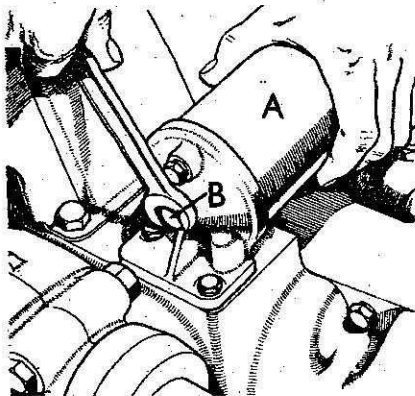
Removing by-pass filter housing (A) by unscrewing bolt (B). On later models with by-pass filter, filter base is mounted on an oil return block for external cylinders rather than being bolted directly to axle housing as shown.
